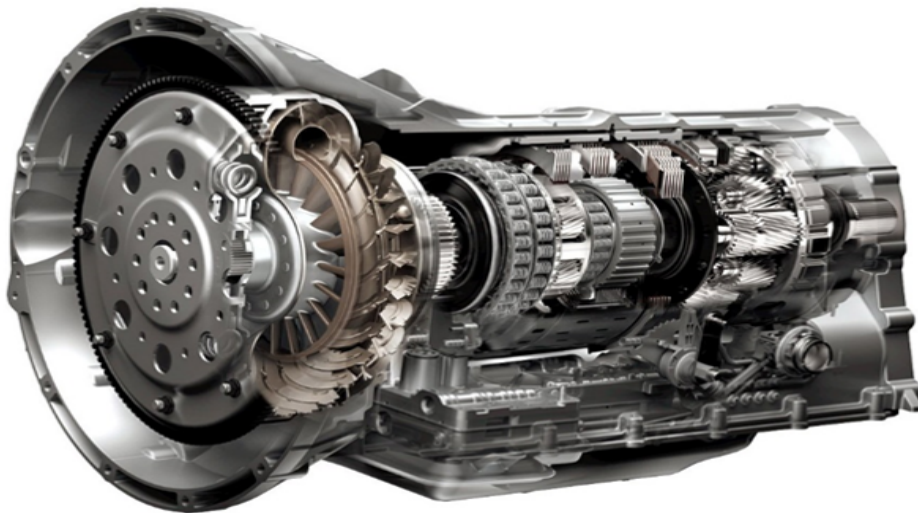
A section view of a CVT design in a hybrid gearbox [2].
